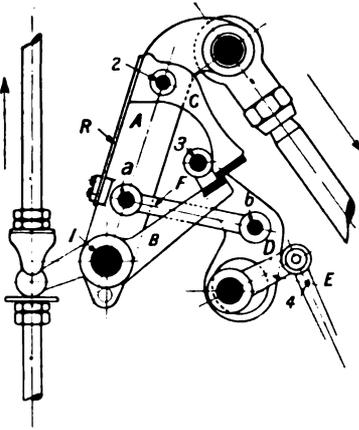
Governor Trip Gear, Oechelhäuser Engine.
